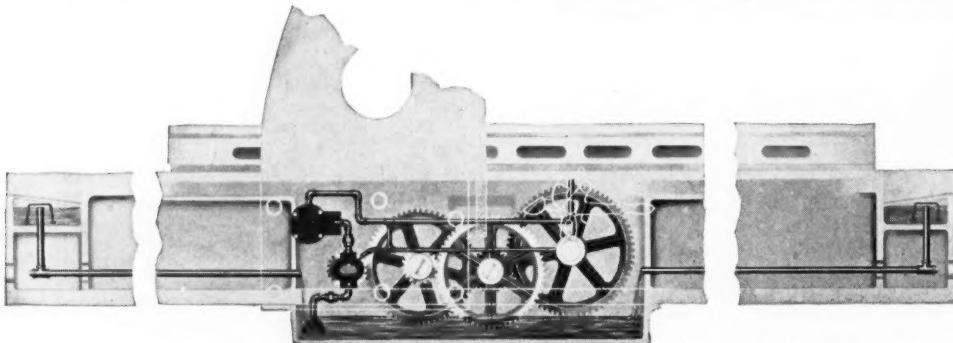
Details of lubricating system for the table drive and spindle mechanism in a vertical turret lathe. Oil is maintained at a constant level, a continuous stream flowing into the reservoir, and by the overflow, lubricating the table gear and pinion as well as the essential bearings. By specially designed guards dust, chips, or cutting compounds are prevented from contaminating the lubricating oil.
